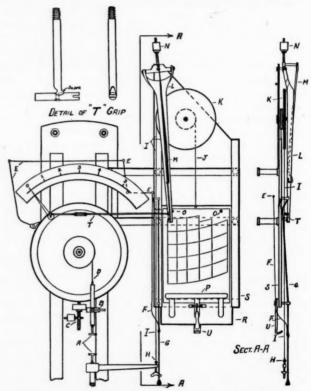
Graphical Rubber-Thread Tester, a Modified Scott Tensile Machine
